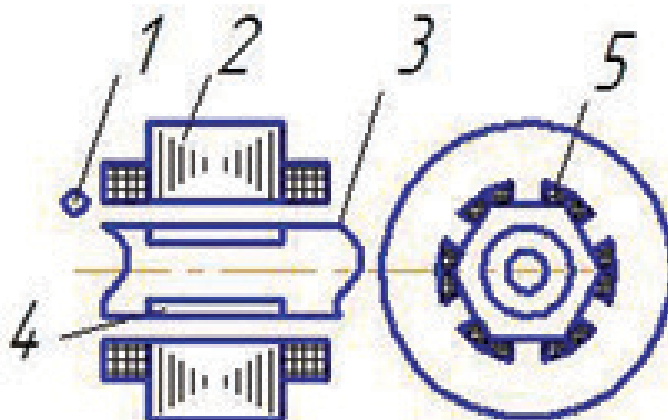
AMB: 1—rotor position sensor; 2—AMB magnetic core; 3—shaft; 4—ferromagnetic sleeve; 5—AMB winding.
